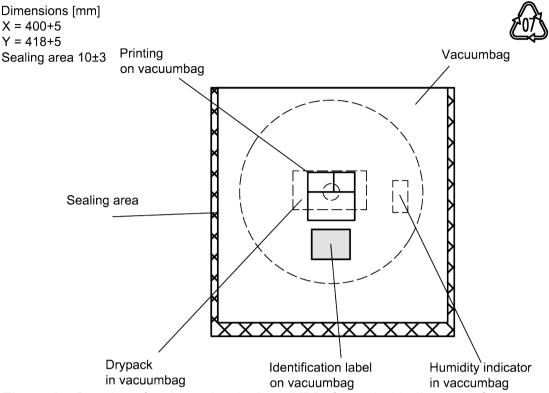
Drawing of moisture barrier bag (MBB) for reel with diameter of 330 mm.
